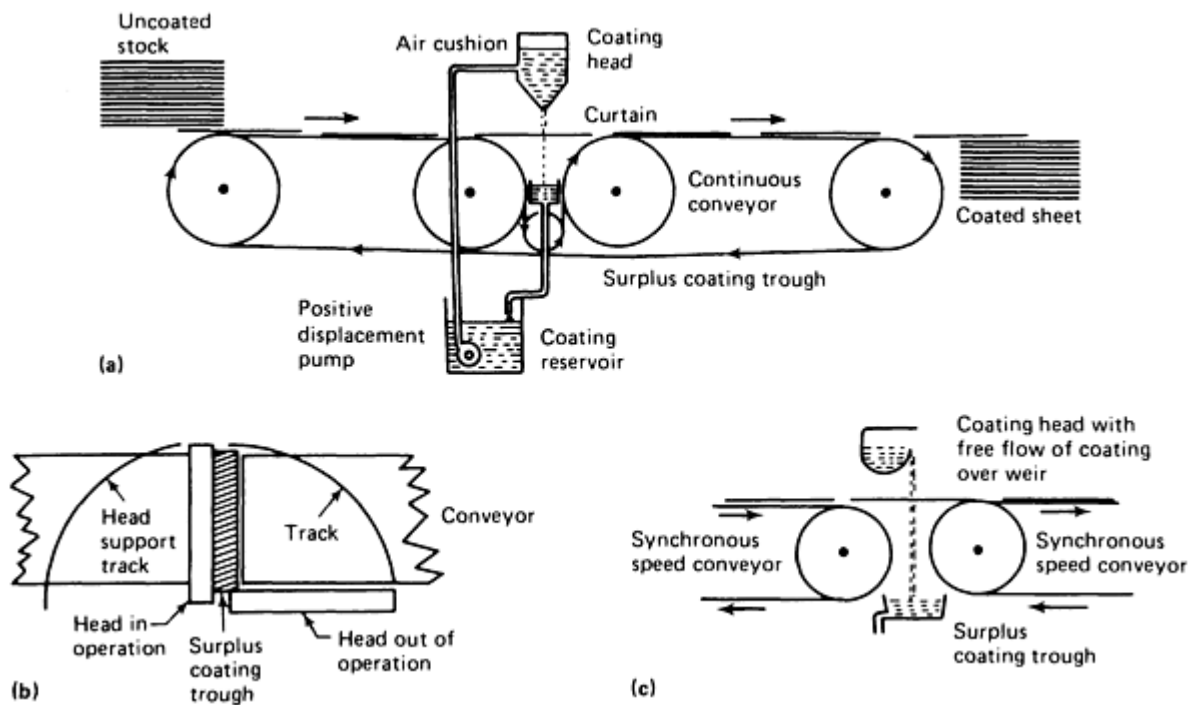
Examples of curtain coating equipment. (a) Pressure head curtain coater. (b) Double head machine gives fast color changes, applies two component coatings. (c) Gravity flow coater with synchronized conveyors
